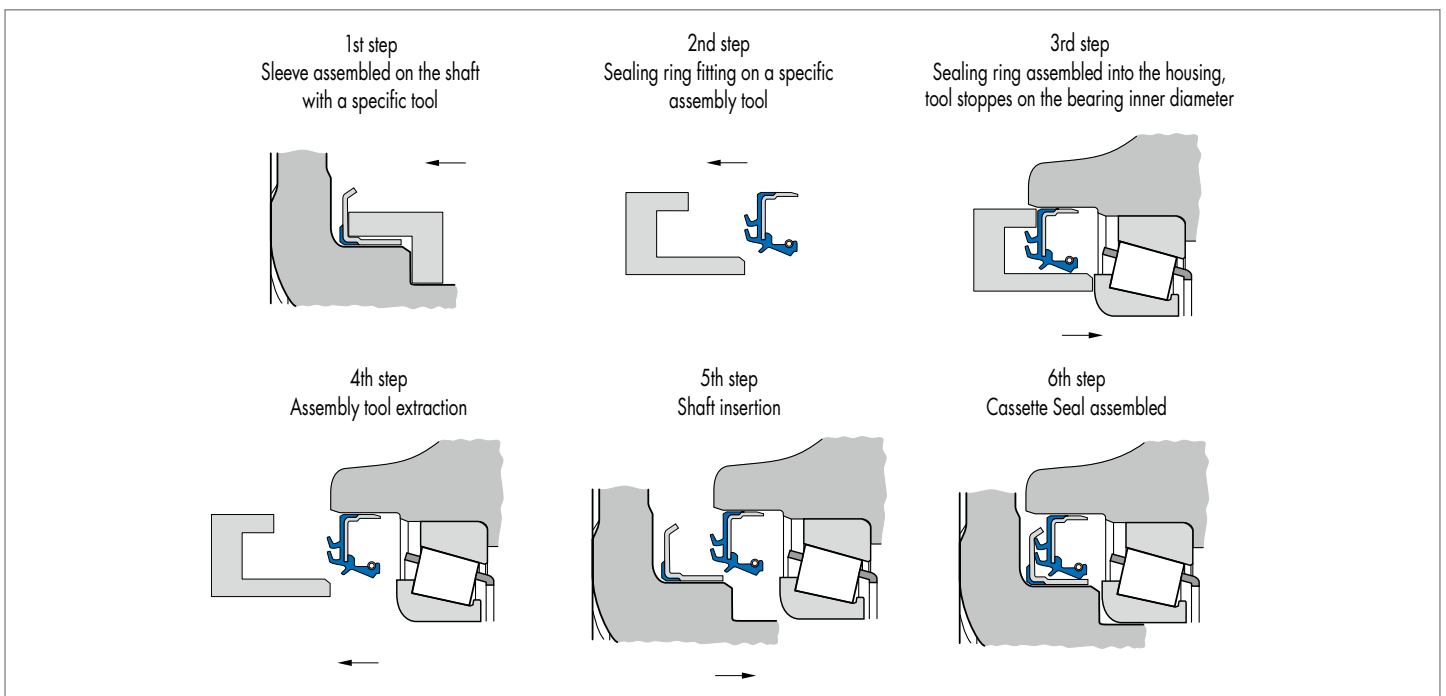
Installation Case E ("2-Step-Assembly") for special types in split execution / Montage d'une bague Simmerring Cassette Seal – Cas E ("2 étapes d'assemblage") pour des formes de construction spéciales dans l'exécution divisée / Montaje de Simmerring Cassette Seal – caso E ("Asamblea en 2 pasos") para diseños especiales en la ejecución de división / Montagem de anel retentor Cassette Seal – Tipo E ("Montagem em dois passos") para projetos especiais em execução dividida
